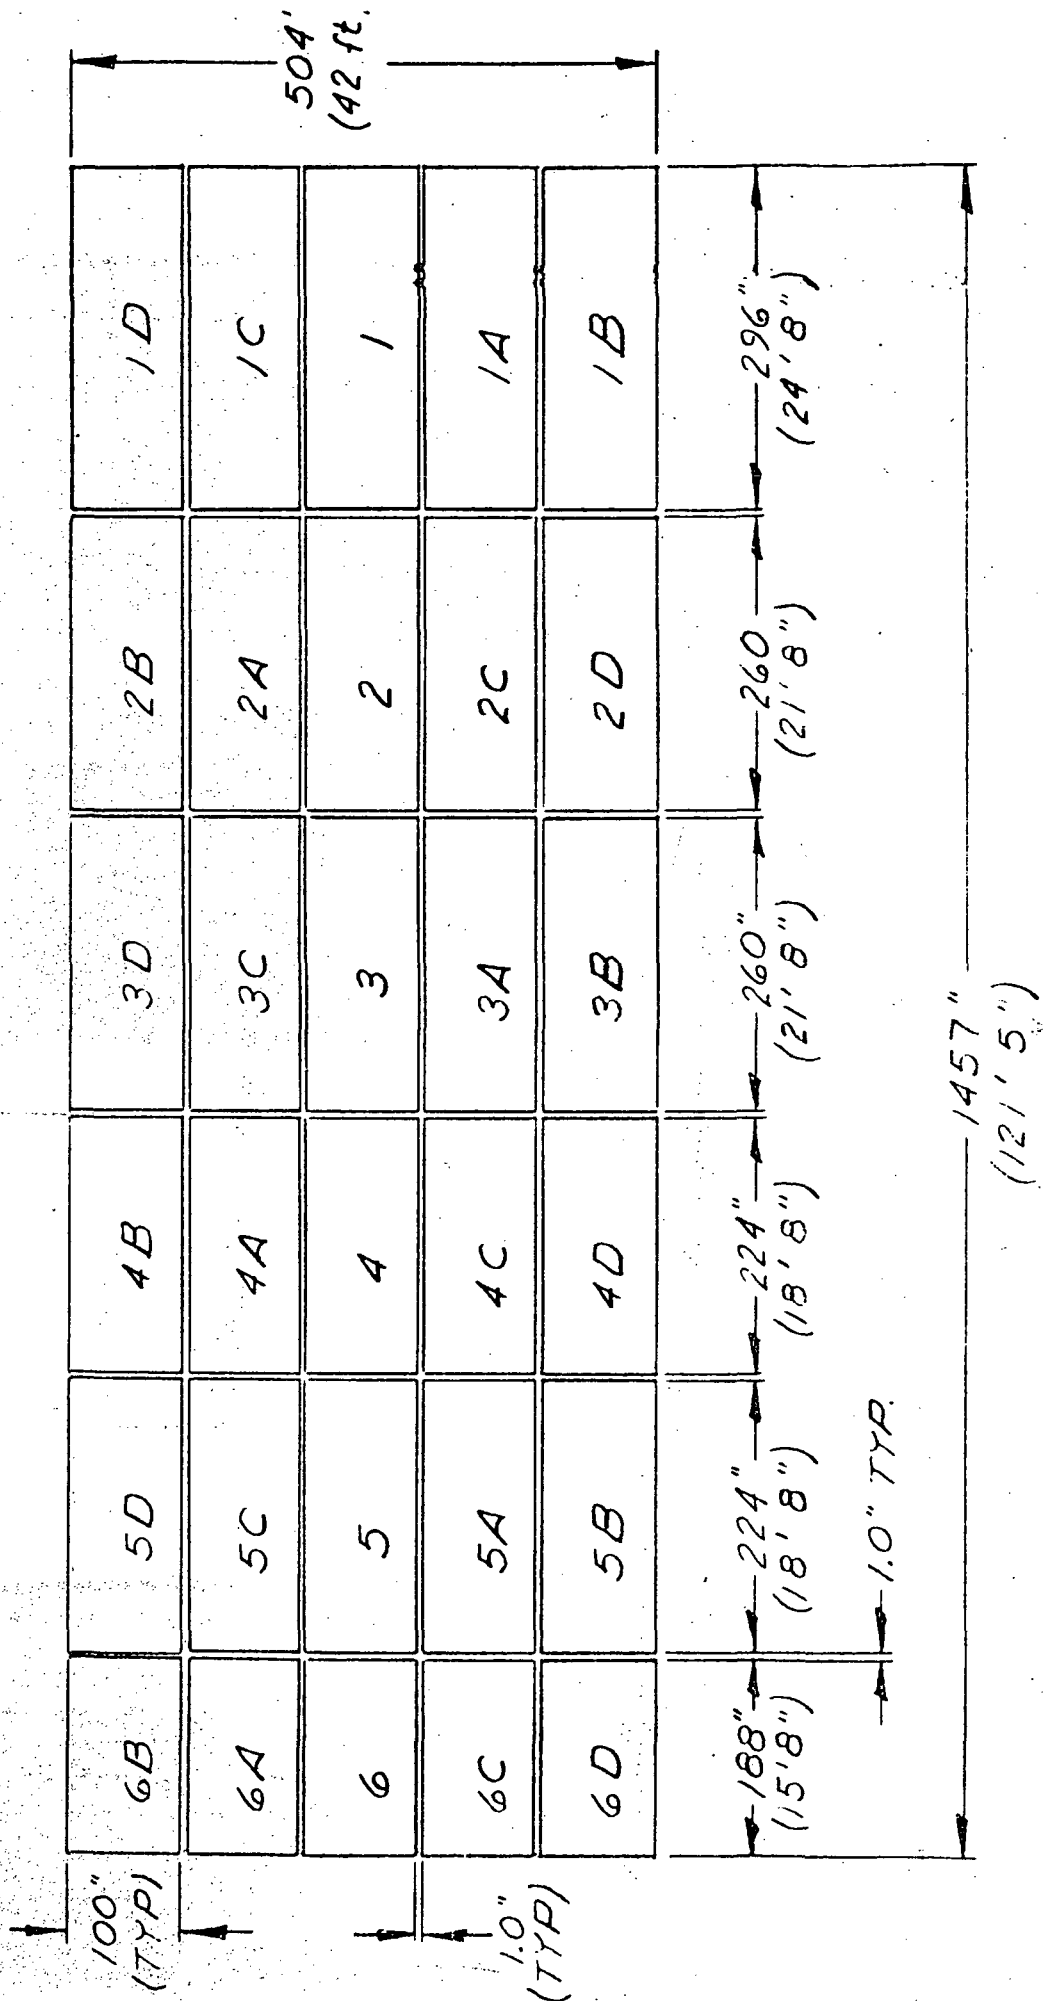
Dimensions of Wing Section of Foldout Panel Array
